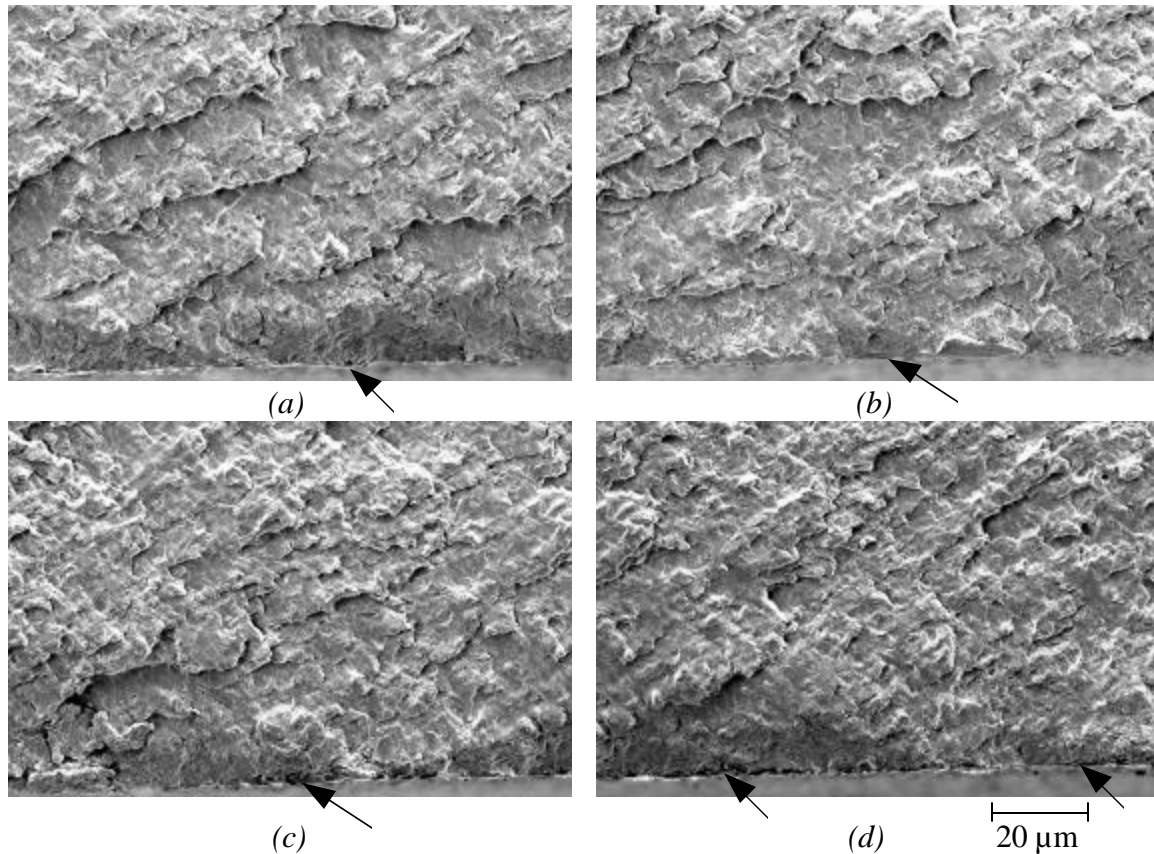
A series of fracture surface photos illustrating several crack nucleation sites.
